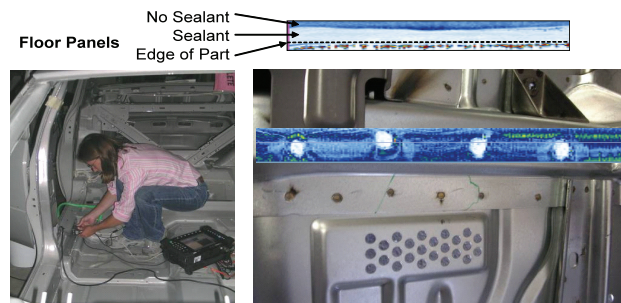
Ultrasonic set-up of the USCAR flange inspection.
